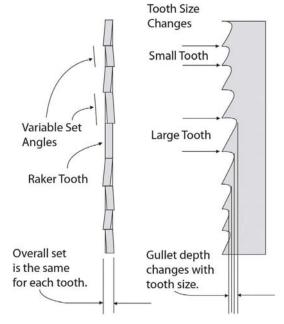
the variable pitch blade is complicated and expensive to manufacture because the size of the tooth and the depth of the gullet both change from one tooth to the next. The design dampens vibration and produces a smooth finish
